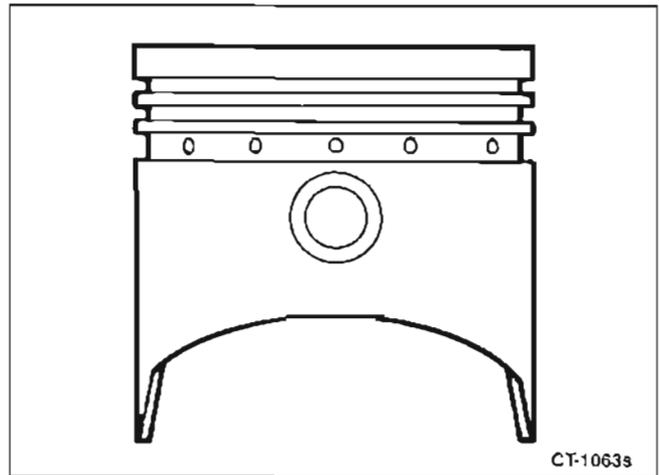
PISTON CLEARANCE MEASUREMENT
